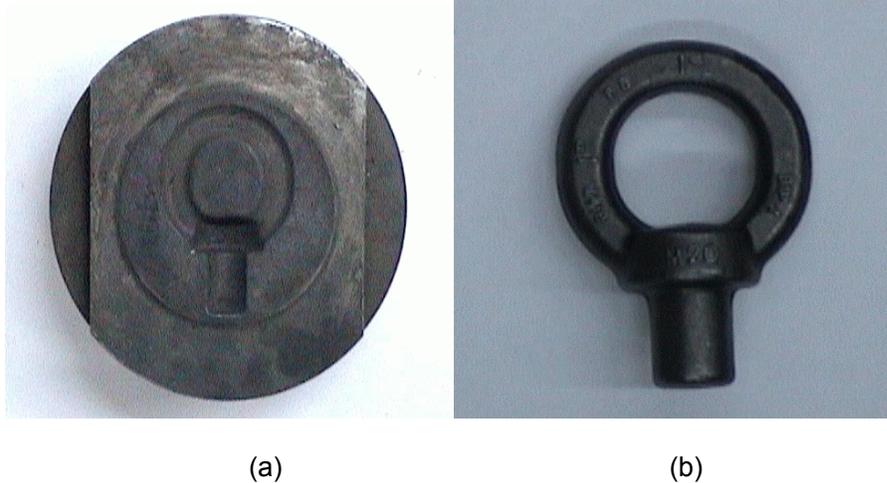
(a) Finish Die Used for the Forging of M20 Eye Bolt and (b) The Final Product
